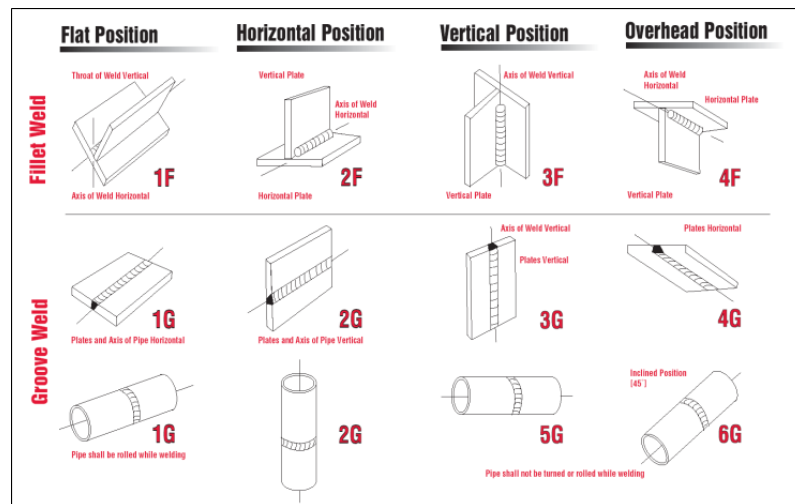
Various positions that a welding can be made (welding- Basic steps, terms, application, different welding joint and positions)
